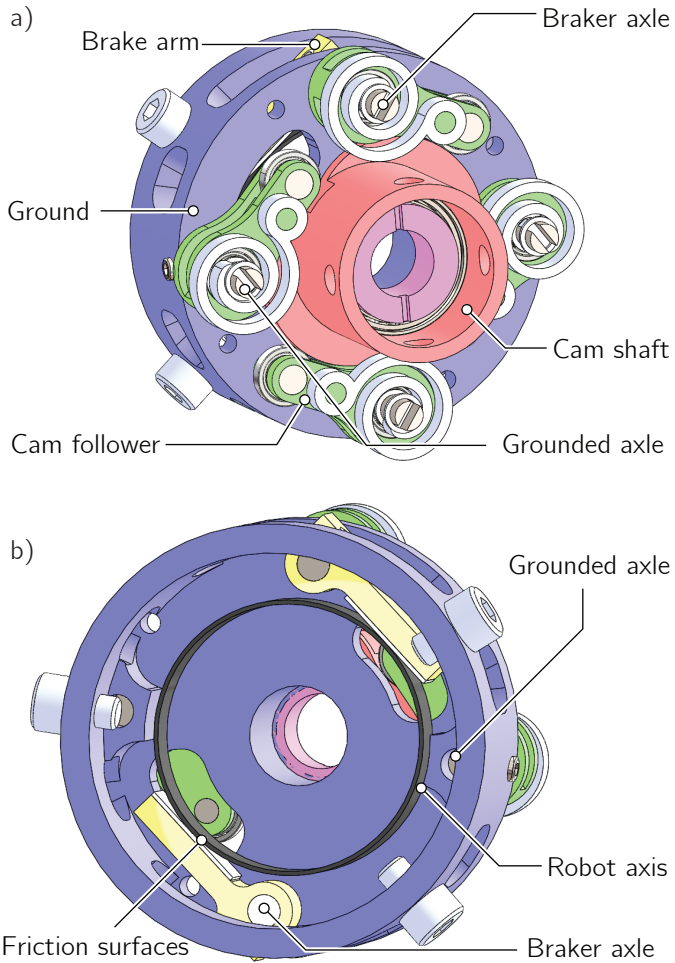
depicts the braking side of the mechanism with the brake arms and the friction surface disk of the robot axis. The radius of the friction surface disk is 16mm. Clearly, the robot axis can pass through the entire braking device without obstructions. This has the advantage that this type of brake can also be used in the middle of an axis. The used friction materials are the specialized friction material Vulka SF-001 and rubber (the same as embodiment 1), which have a friction coefficient of 0.8.
